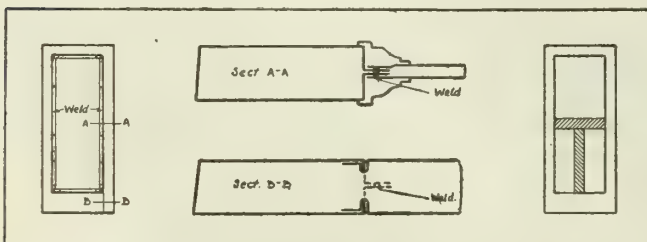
DETAILS SHOWING CONSTRUCTION OF THE STANDWELL DOOR
